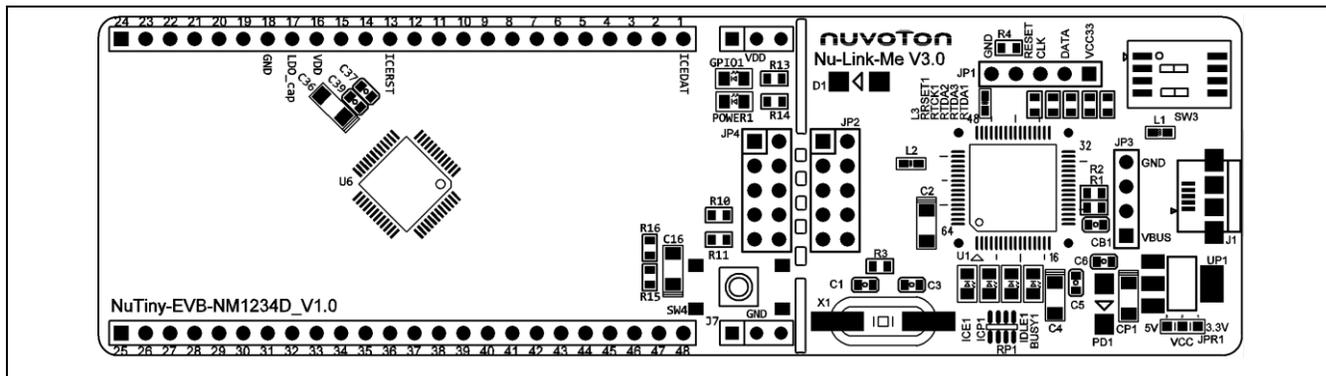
NuTiny-EVB-NM1234D PCB Placement
